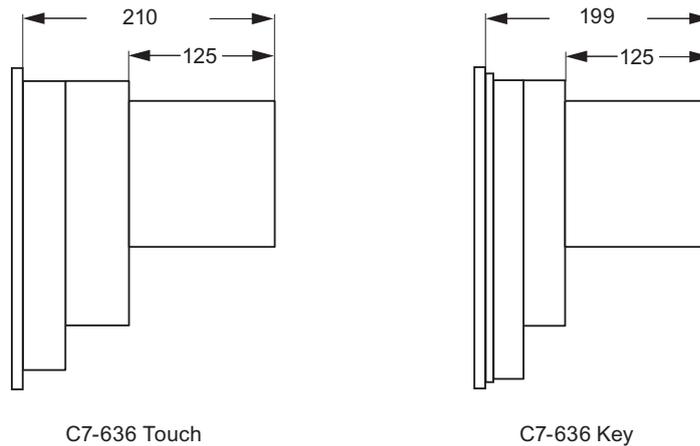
Mounting depth of the I/O set for 4 modules, set deep (dimensions in mm)
